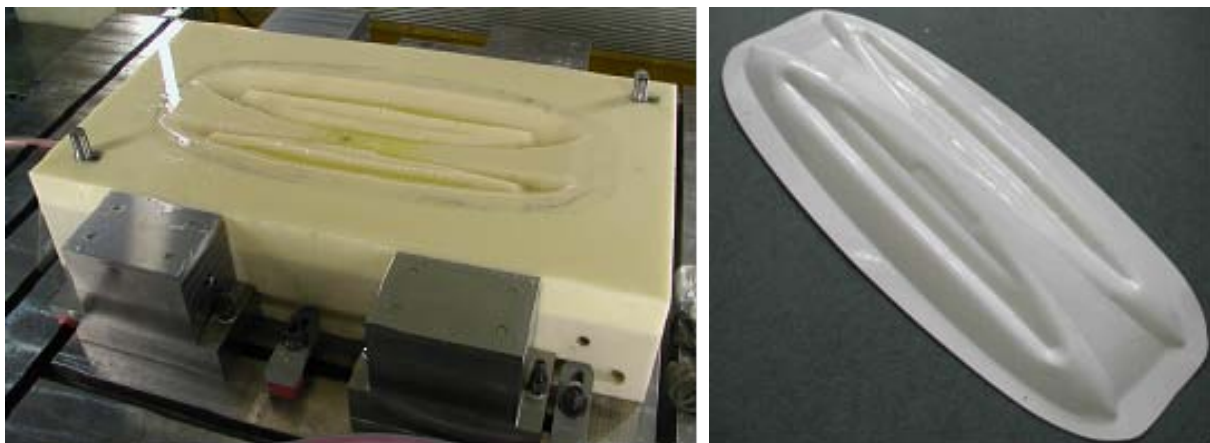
Powder precoated aluminum blank formed into an automotive part (right) in a plastic based hydroforming tool (left).
